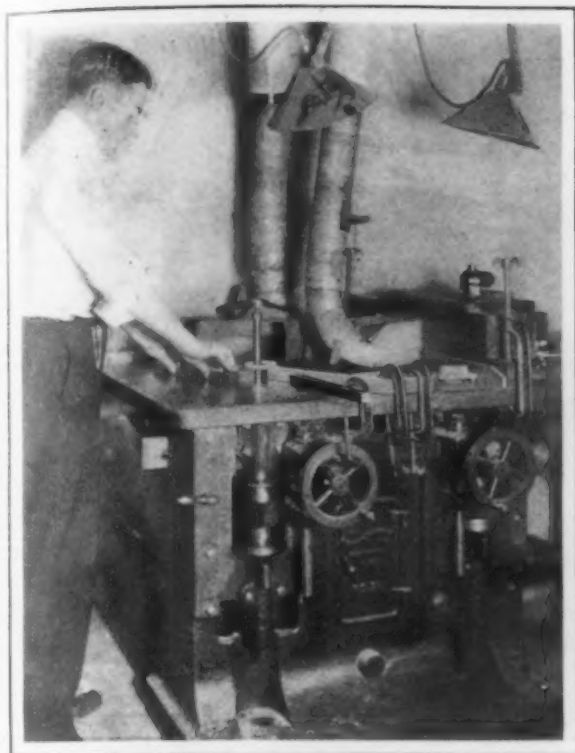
Safety Guard for Small Groove Saw on Shaper Consisting of Metal Disk on a Flat Wire Spring with Center Opening Larger than the Spindle
